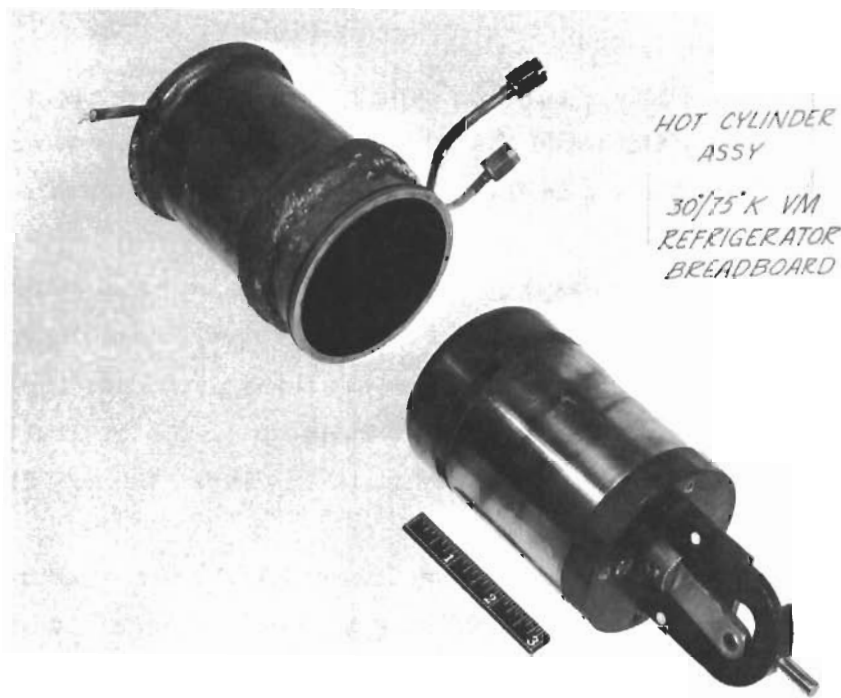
Hot cylinder assembly parts of unit 447550-100 (HAC photo 4R02920)
